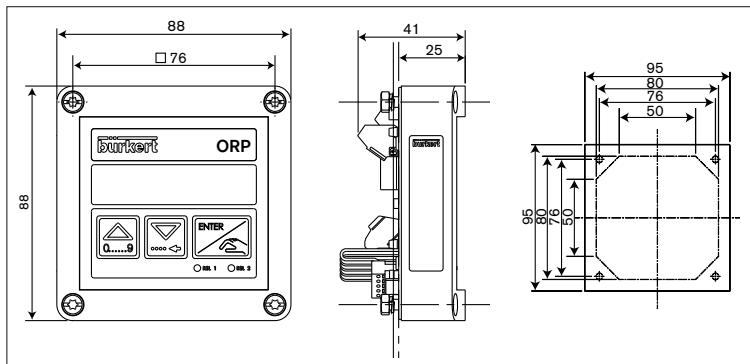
Dimensions redox transmitter 8206 panel-mounted version, and drilling jig
